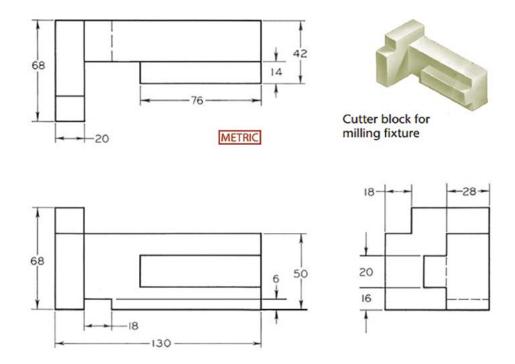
Dimensioning a machine part composed of prismatic shapes
